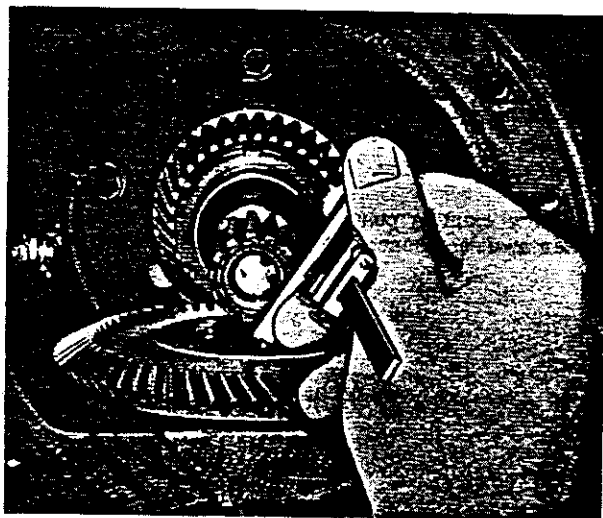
Depth Gage Reading from End of Power Shaft to End of Compressor Rotor
